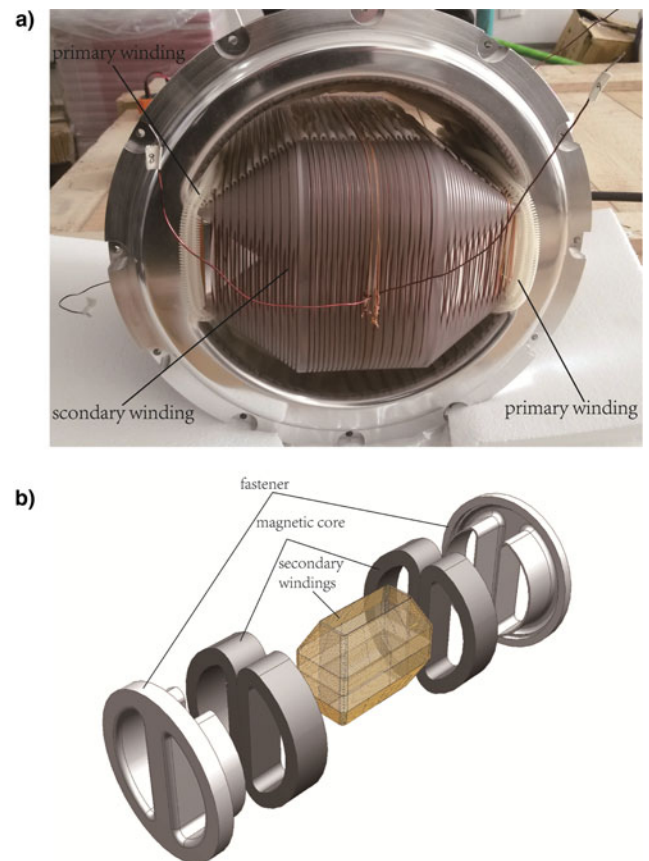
Structure of iron core transformer with biconic windings: (a) completed assembly, (b) exploded view showing its various components.
